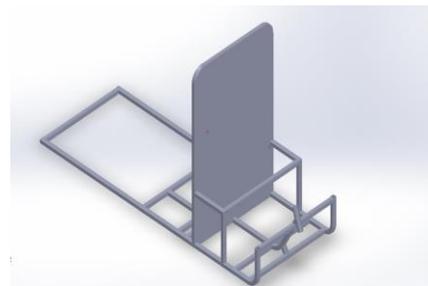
CAD model of Chassis of the three-wheeled electric cart.
